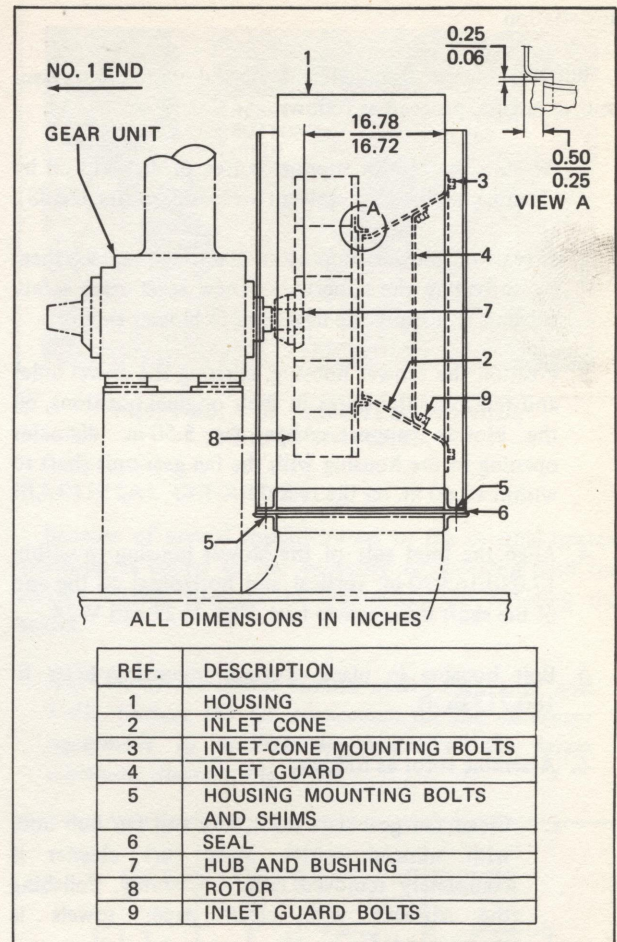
EQUIPMENT BLOWER ASSEMBLY.
